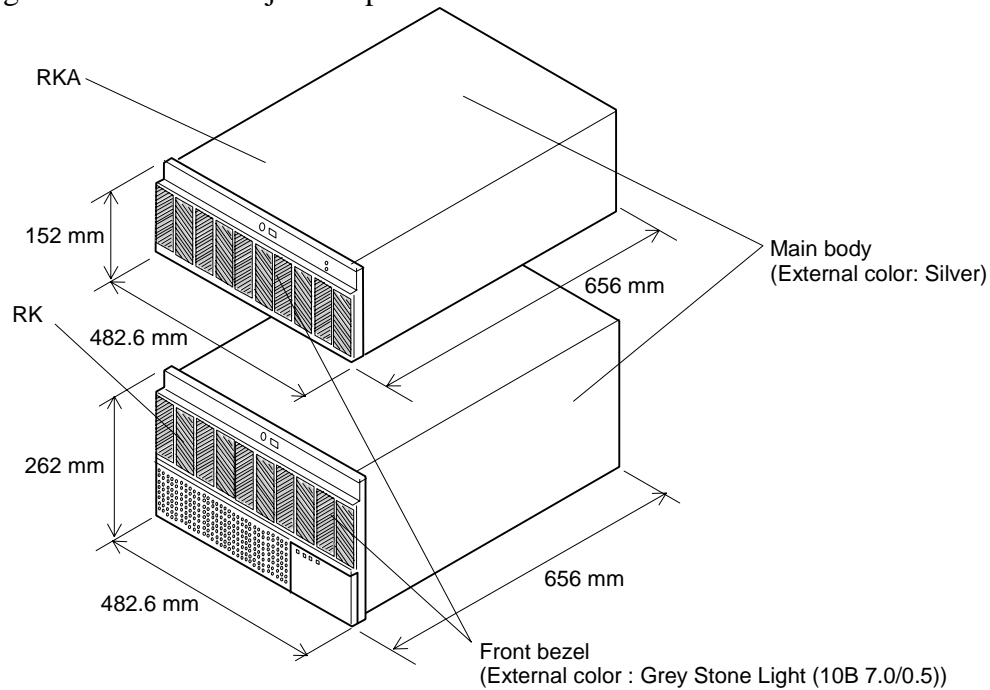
Appearances and Dimensions of the RK and RKA
